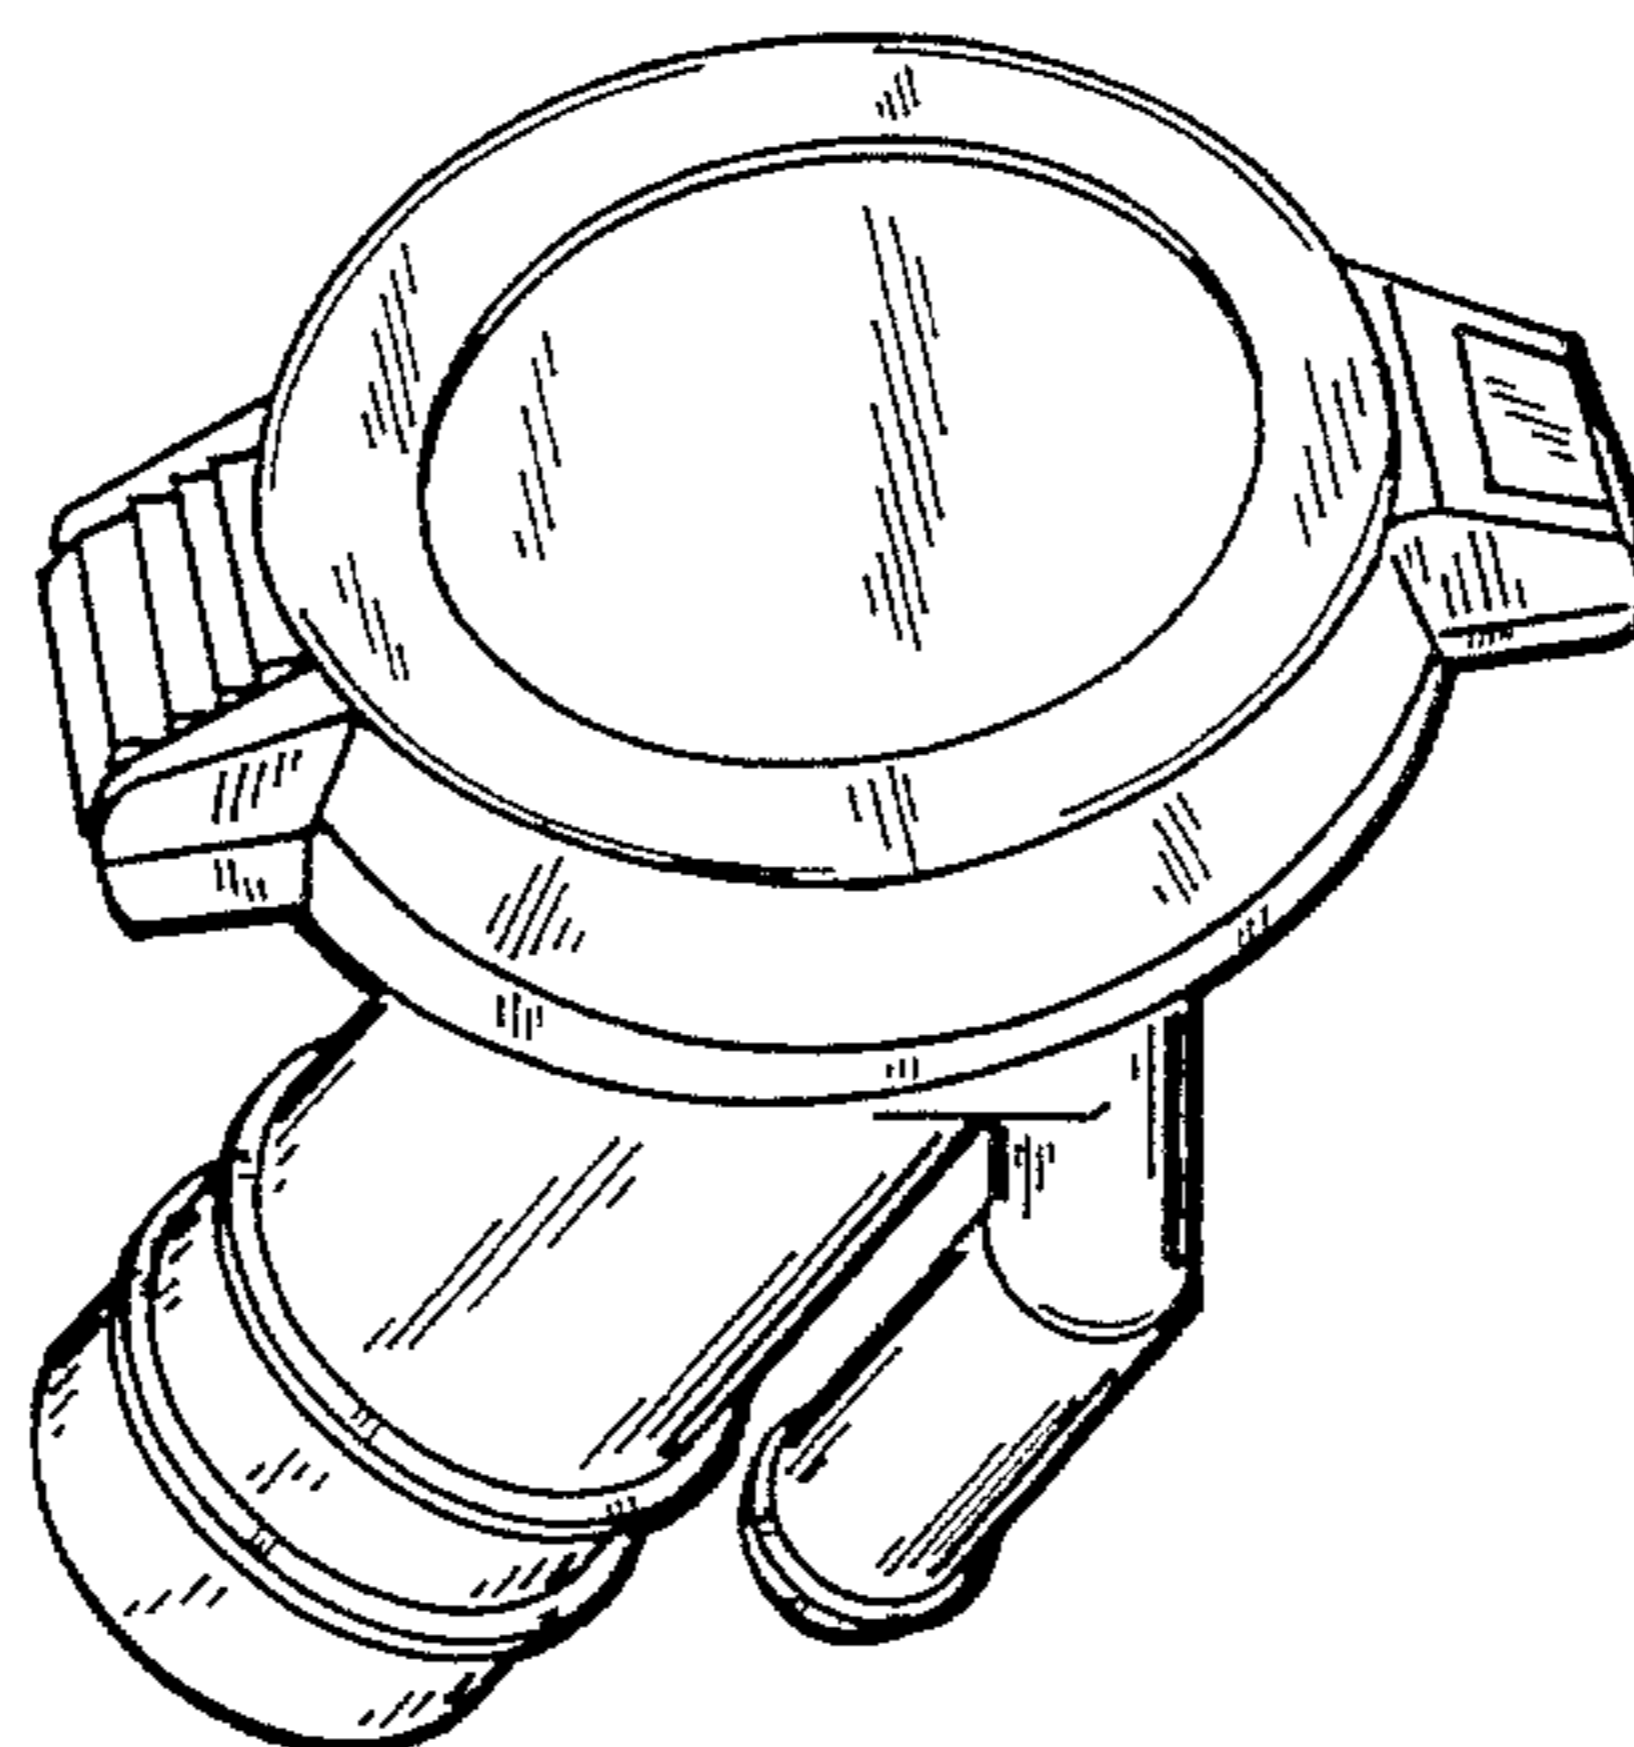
is a top perspective view of an eighth embodiment of the fuel fill device for boats;
